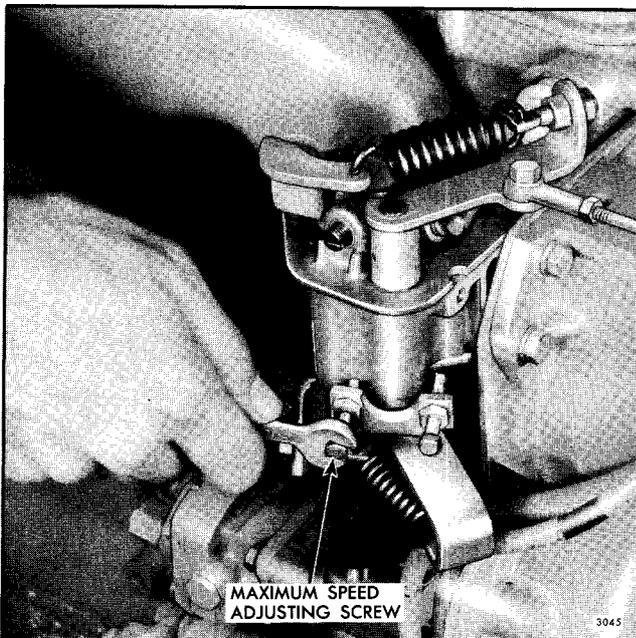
Adjusting Maximum No-Load Engine Speed
